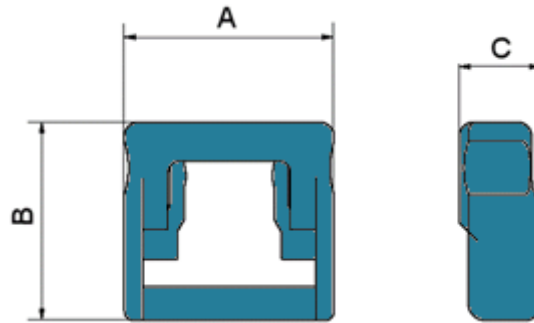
PLUG CONNECTOR LOCKING CLIP
